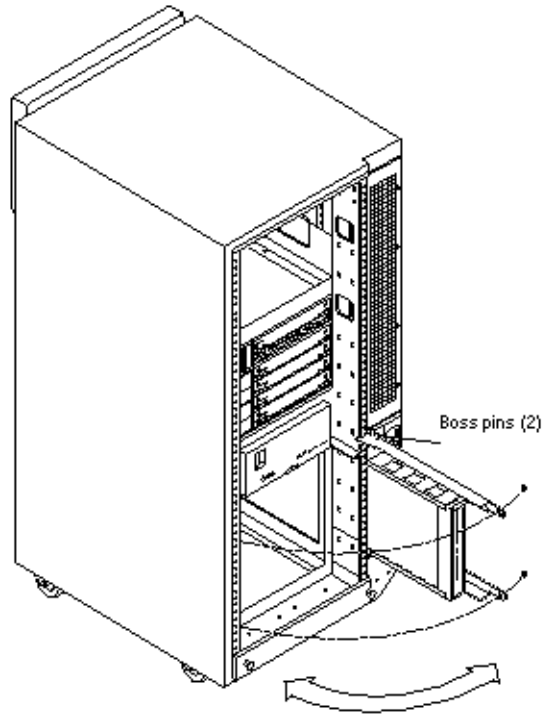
Terminal Concentrator Bracket Installed on the Hinge
